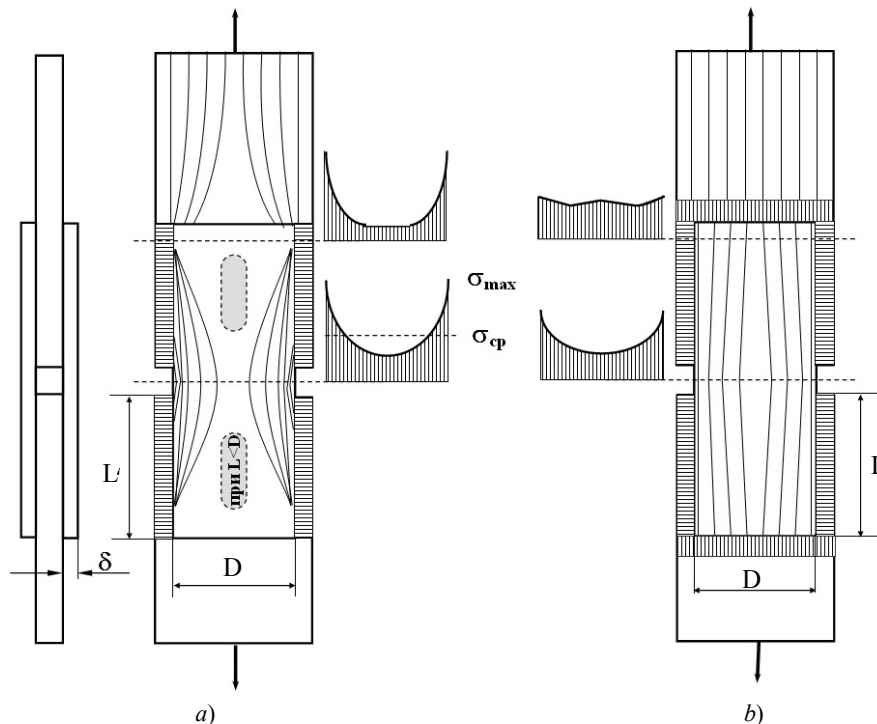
Stress distribution in lap joints: a) with flank welds; b) with composite weld
